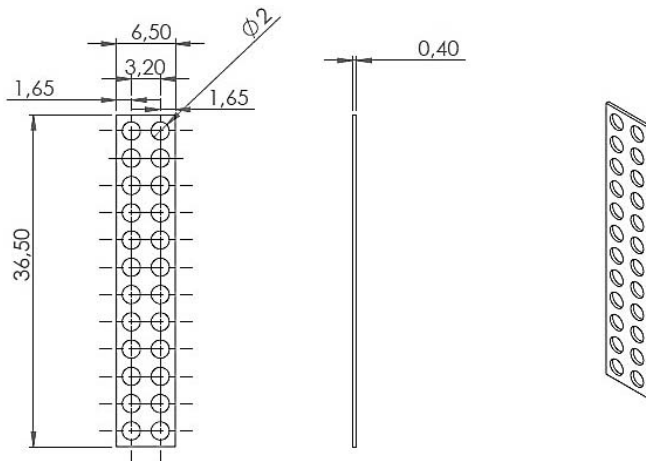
Titanium mesh drawing with the dimensions used (in mm).
